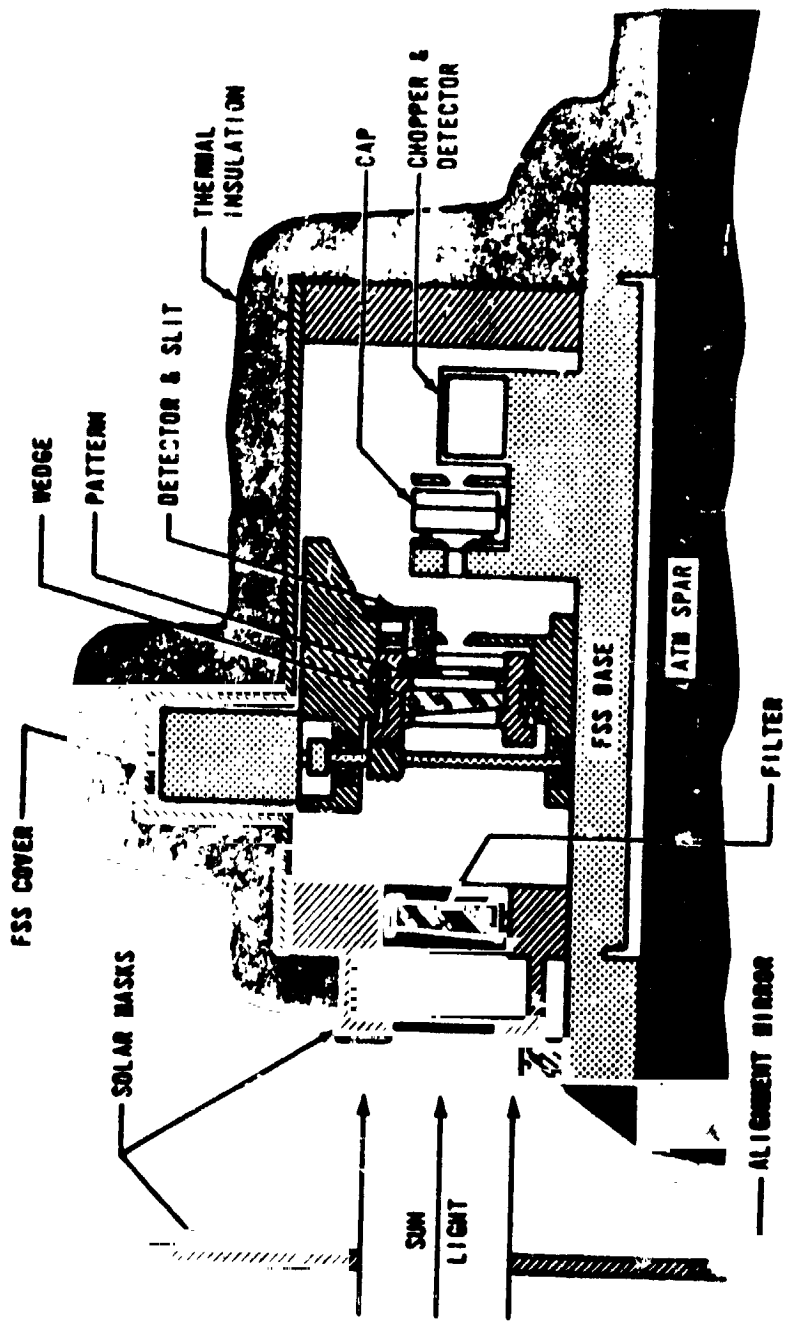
Cross Section Of FSS Optical Mechanical Assembly
